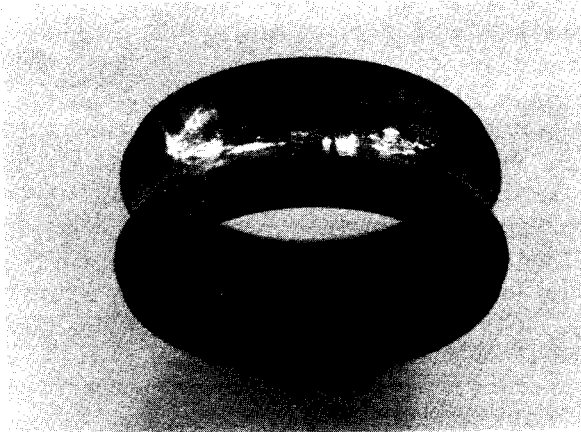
Inner Race of Bearing with Acid Etching.
